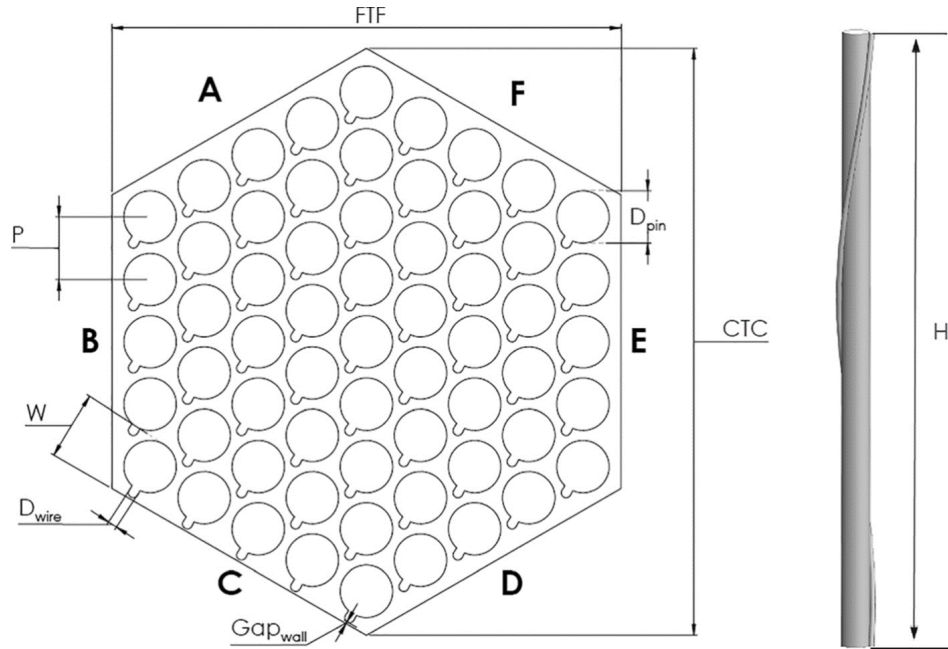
Horizontal cross section through the test section and relevant dimensions of the pins, wires, and hexagonal duct enclosure.
